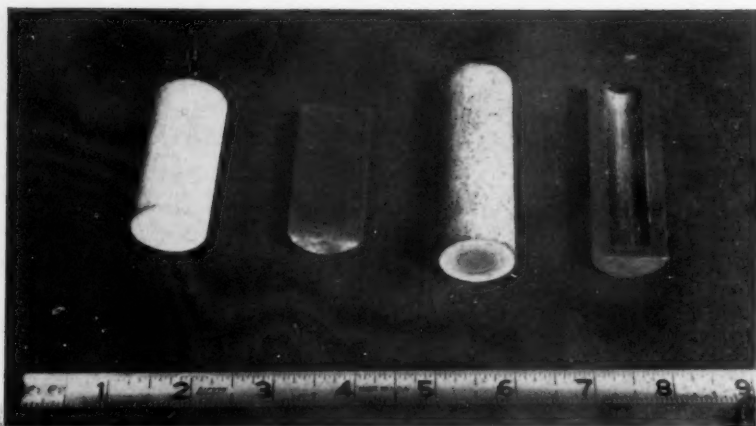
(left).—Slug and part produced by backward extrusion operation
